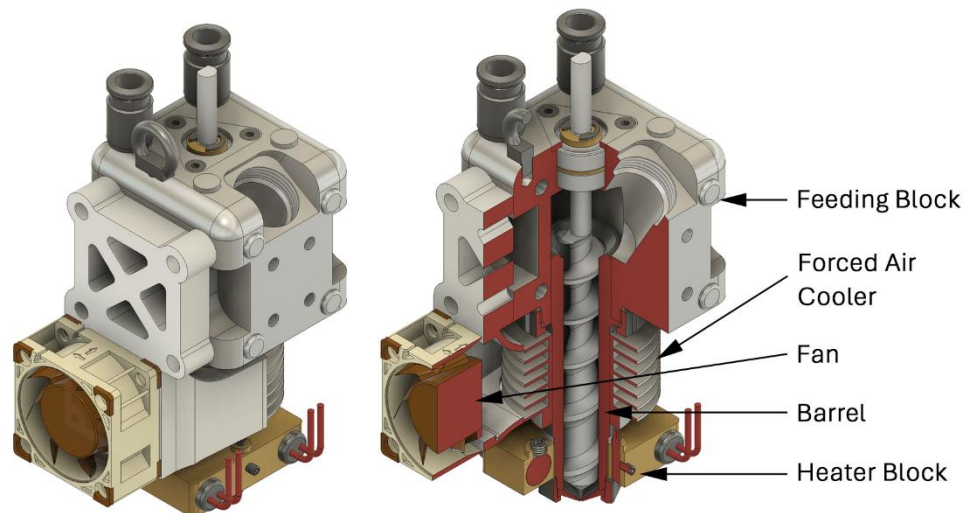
Extruder with heater block and cooler, isometric view and cross-section.
